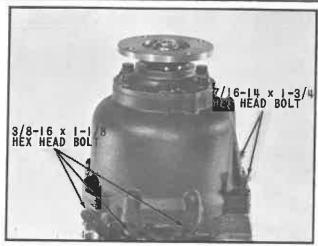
Bolting Reduction Unit to Forward and Reversing Transmission
